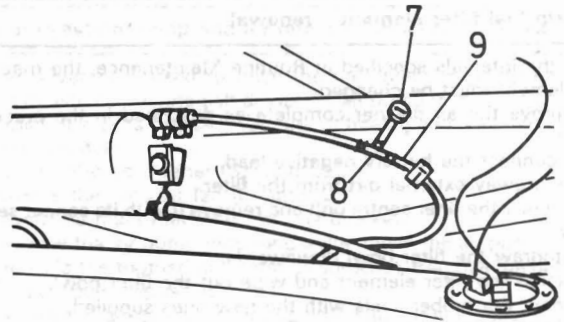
Vacuum relief valve (7) and connecting pipe (9) (Sec 19)
